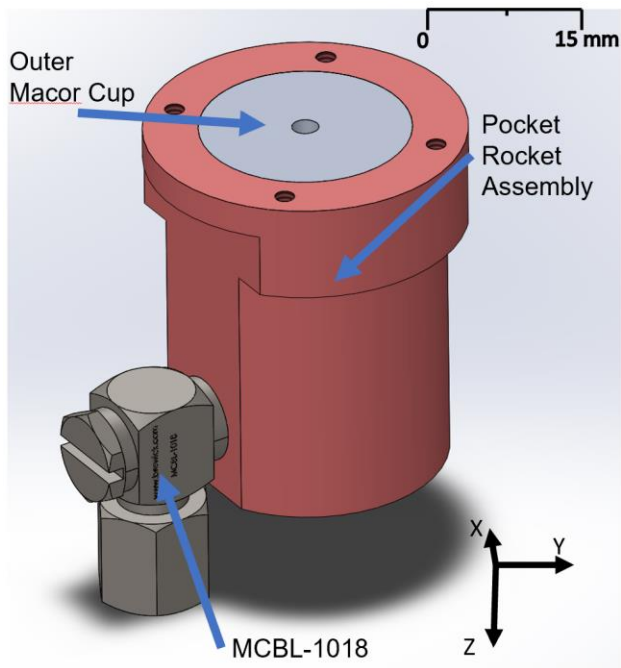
MCBL-1018 attached to the Pocket Rocket thruster propellant inlet
